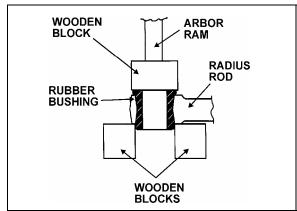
RADIUS ROD BUSHING INSTALLATION 16012
